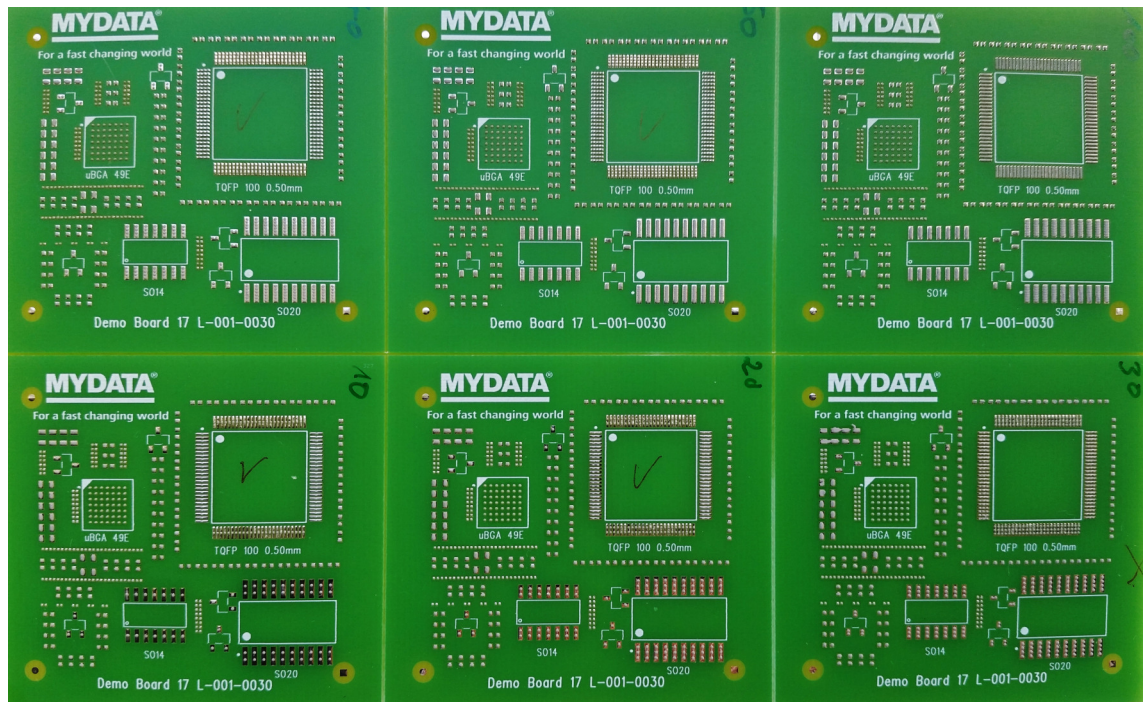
Photograph of an exemplary jet printed PCB, used for examinations and developments in this thesis. The 6 sub-PCBs contain varying amounts of solder paste.
